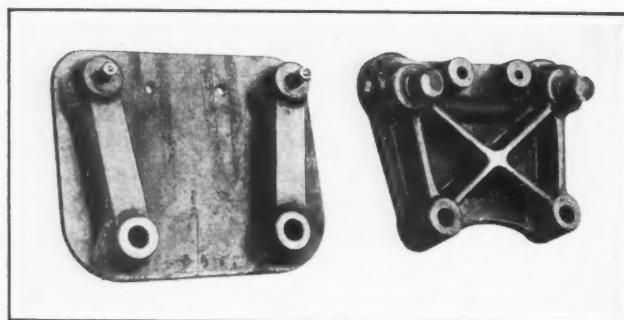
Welded Steel Trolley Side and Same Part Made of Malleable Iron
